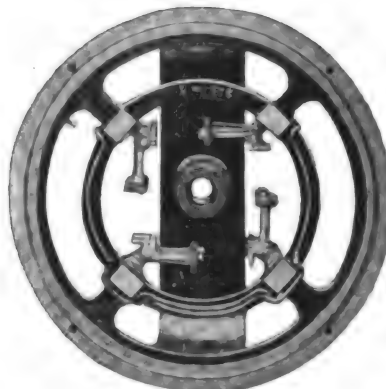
COMMUTATOR BEARING SHOWING BRUSH RIGGING.
